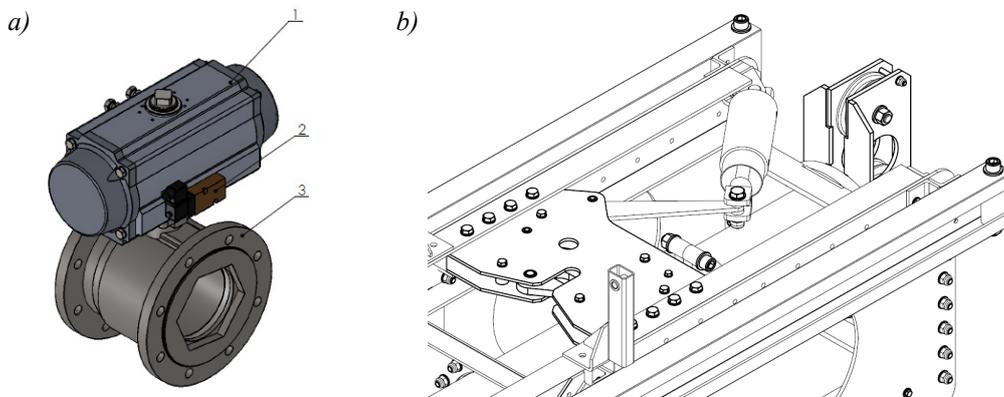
a) pneumatic launch pad control system (1 – shuttle actuator, 2 – 5/2 manifold, VL 140 F ball valve), b) trolley release system
